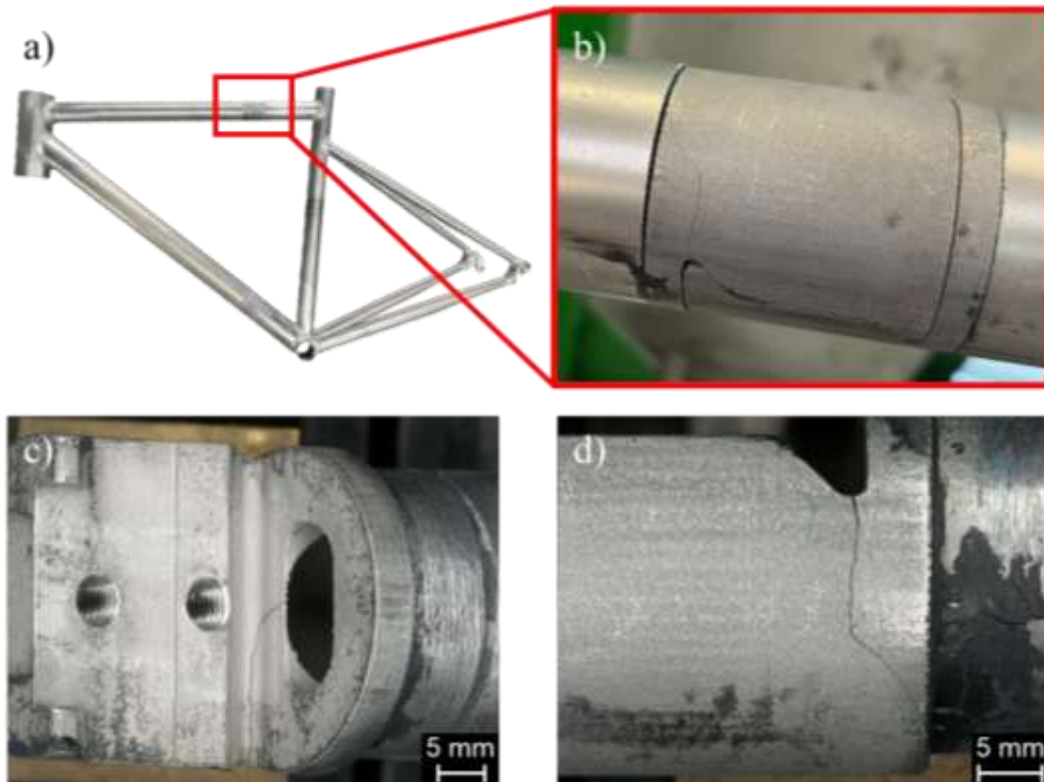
(a) Frame after fatigue test and (b) crack observed in the top-tube joint; (c) front view and (d) side view of the failed joint showing the crack path.
